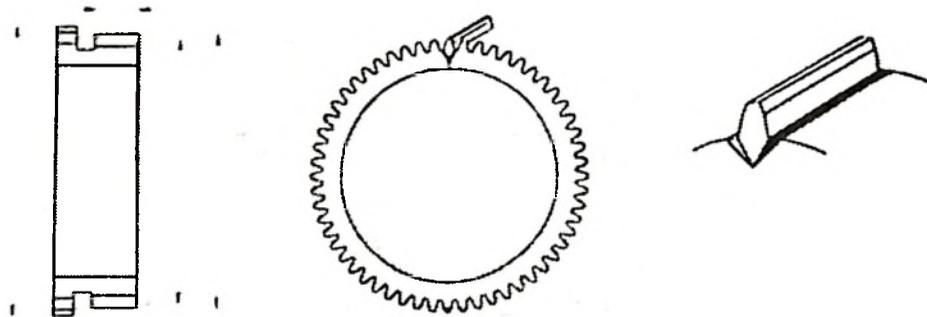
Assembly of pre-machined gear teeth on the hoist of billet handling crane
